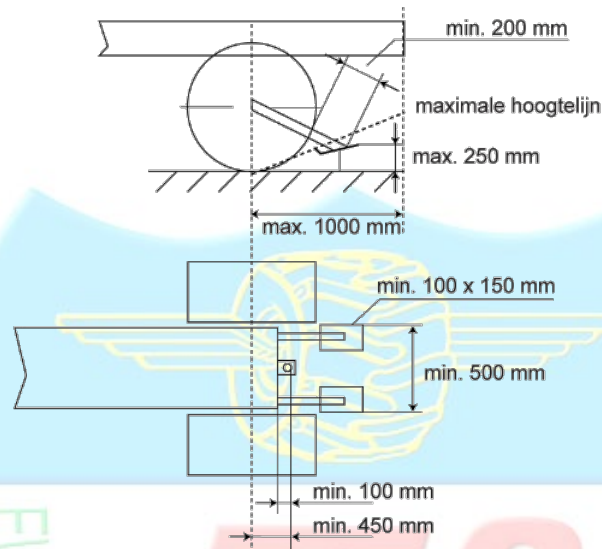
Dimensions stabiliser bars, stock, sport and supersport trucks
